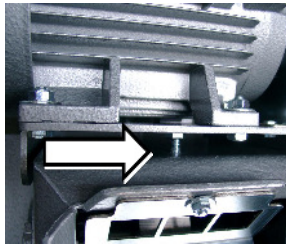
V-belt tensioning screw between motor plate and machine housing
